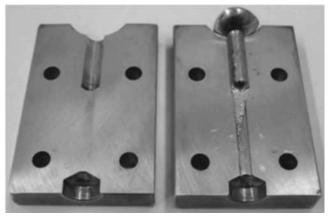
Cylindrical suction-casting mould Rys. 3. Cylindryczna forma do odlewania próżniowego
